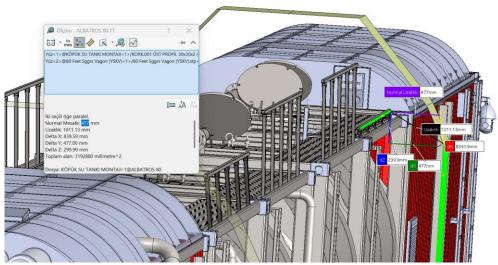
Guardrail arrangement on ISO tank following envelope clearance testing.
